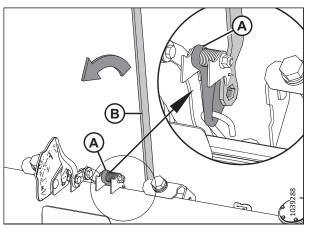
Multi-Tool Engaged with Left Float Setting Assembly
